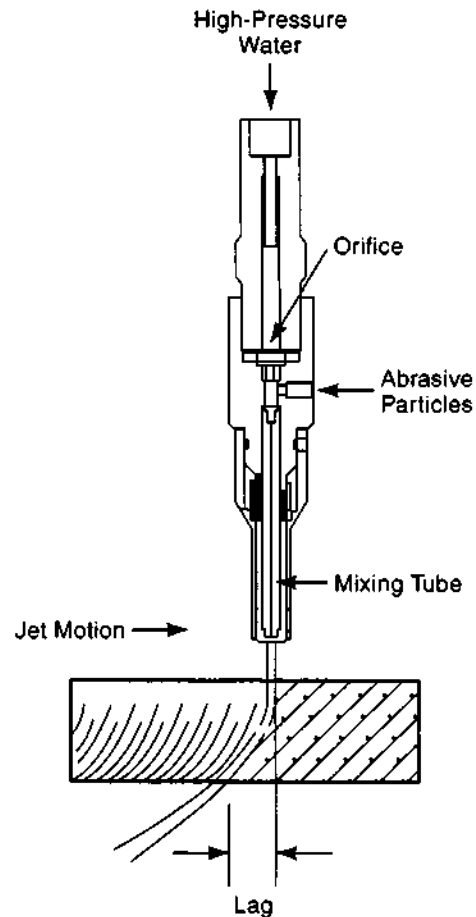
M1 Schematic view of abrasive water jet machining. (Courtesy Omax Corporation.)
